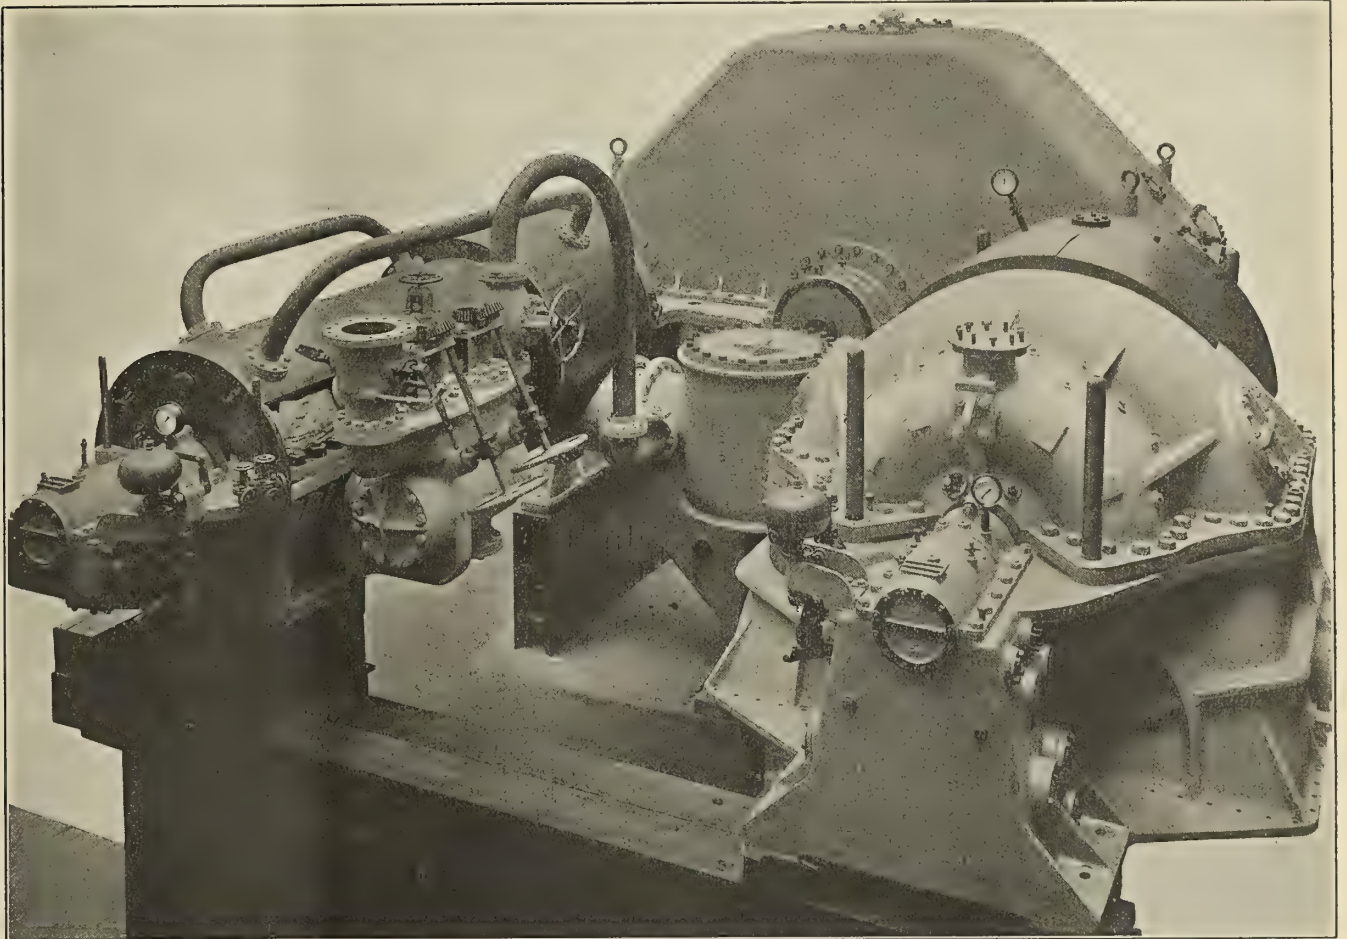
High and Low-Pressure Turbines and Reduction Gear Assembled. Astern Turbine Incorporated with Low-Pressure Ahead Turbine
